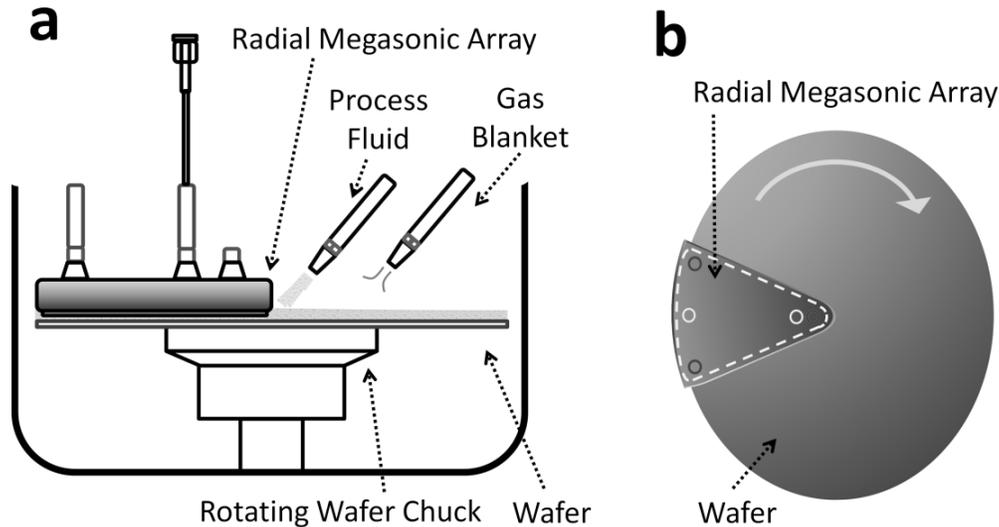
Schematic sketch of the single wafer spin-cleaning tool MegPie<sup>®</sup>. (a) Cross-sectional view and (b) top view.
